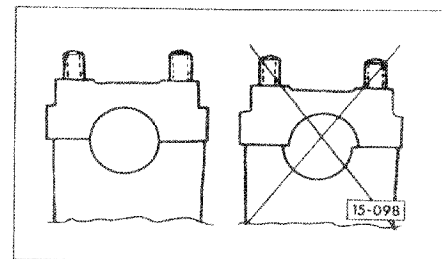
Cross-section of camshaft bearing, showing cap installed correctly (left) and incorrectly (right).
